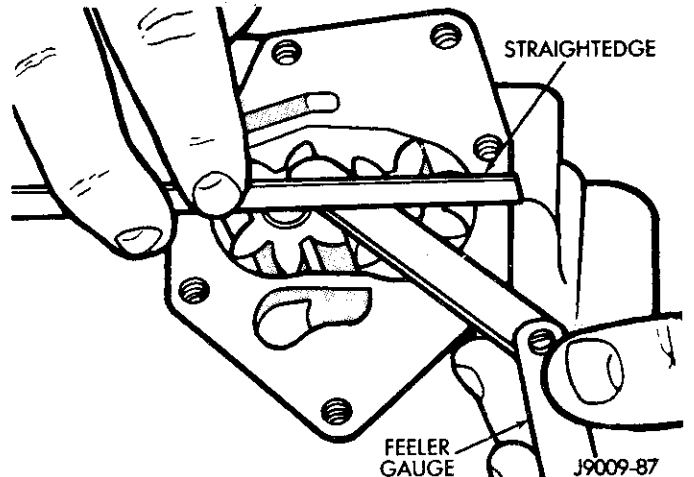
Oil Pump Gear End Clearance Measurement - Feeler Gauge Method
